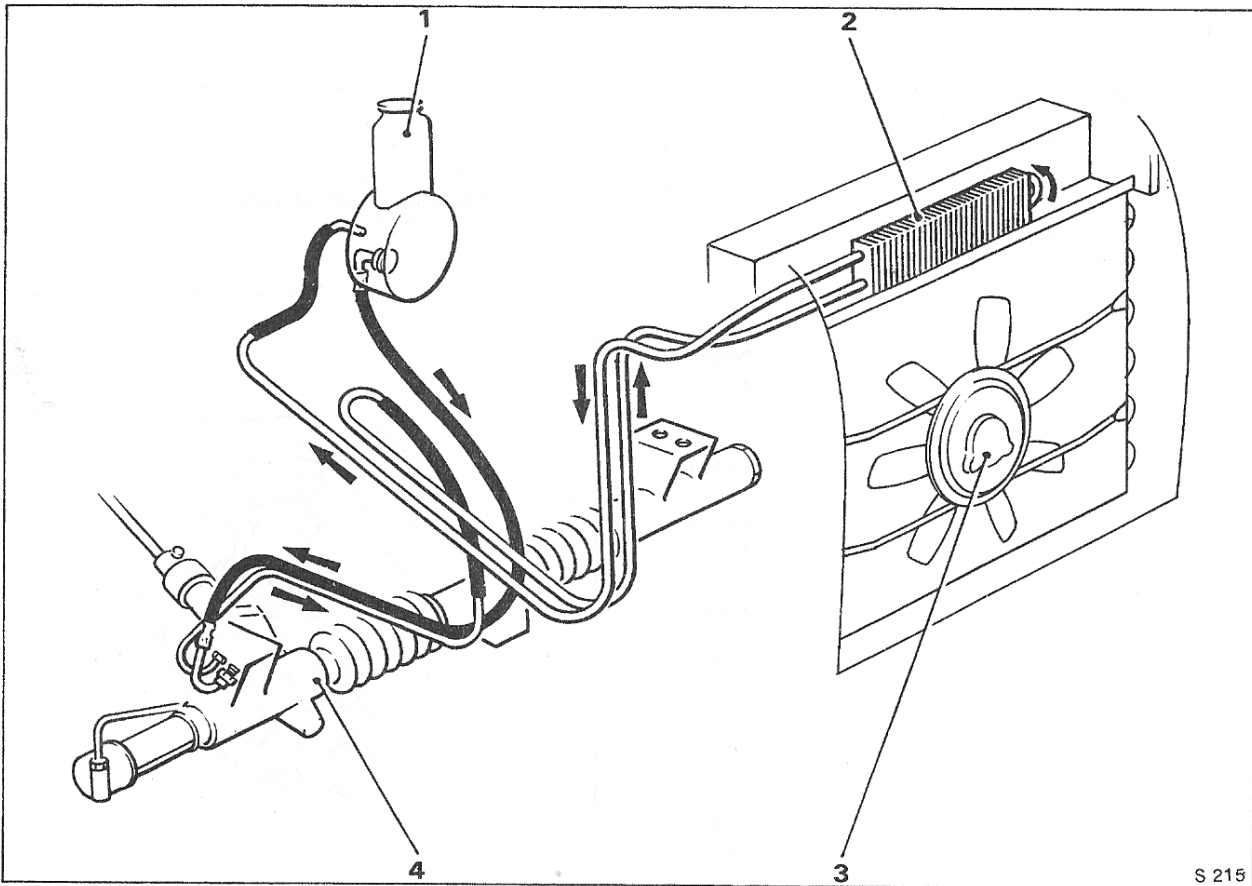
Hydraulic pipe runs. Right-hand drive car
